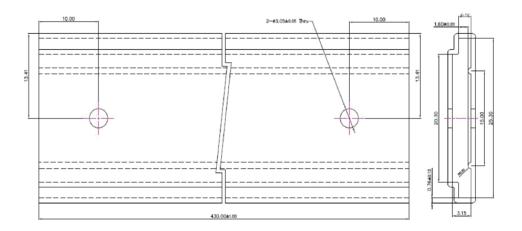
Tube dimensions for L2C5-xxxx1205x130x, L2C5-xxxx1208x150x and L2C5-xxxx1210x150x.
